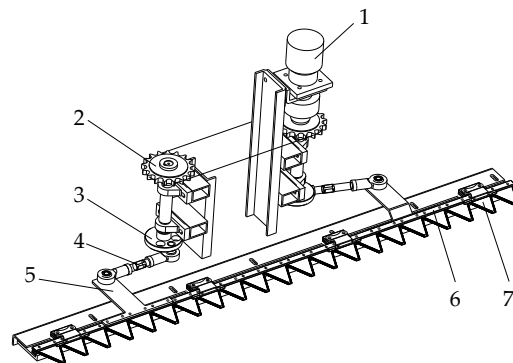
Structure diagram of the cutting device. 1. Hydraulic motor; 2. sprocket drive device; 3. eccentric disc; 4. articulated bearing components; 5. connecting arm; 6. blade-fixing rod; 7. blade.
